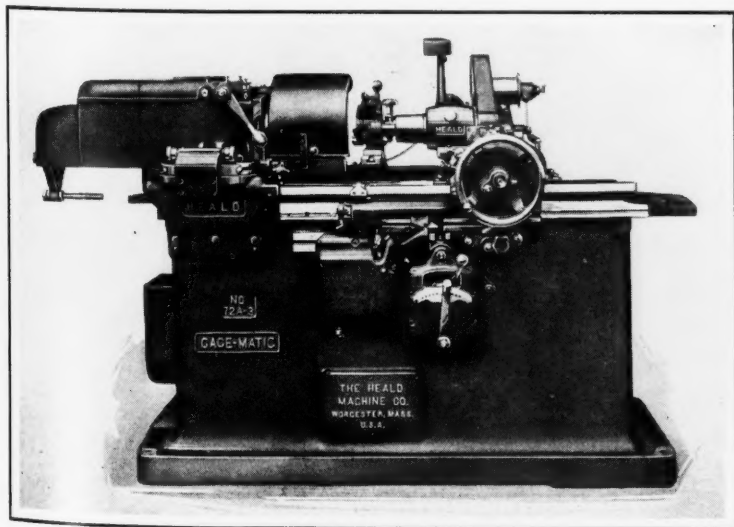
"Gage-Matic" Internal Grinding Machine with Sizing Feature
